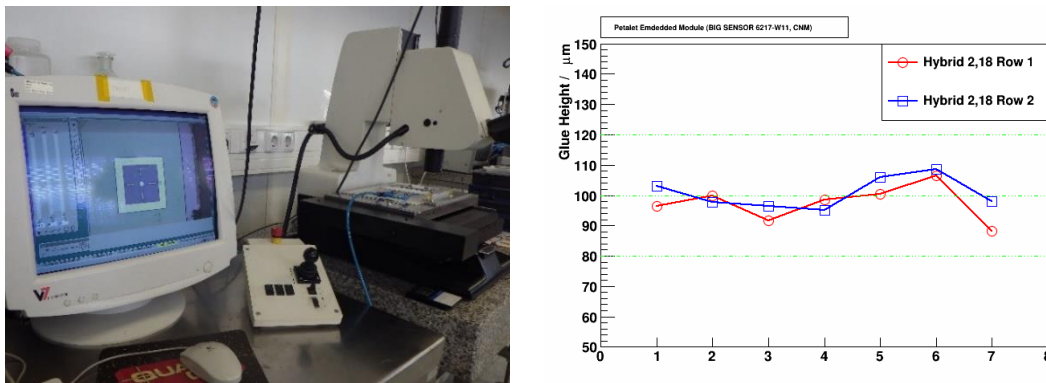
Measurement of the glue thickness between hybrid and sensor. Equipment used in the measurement (left) and results for a built module (right).
